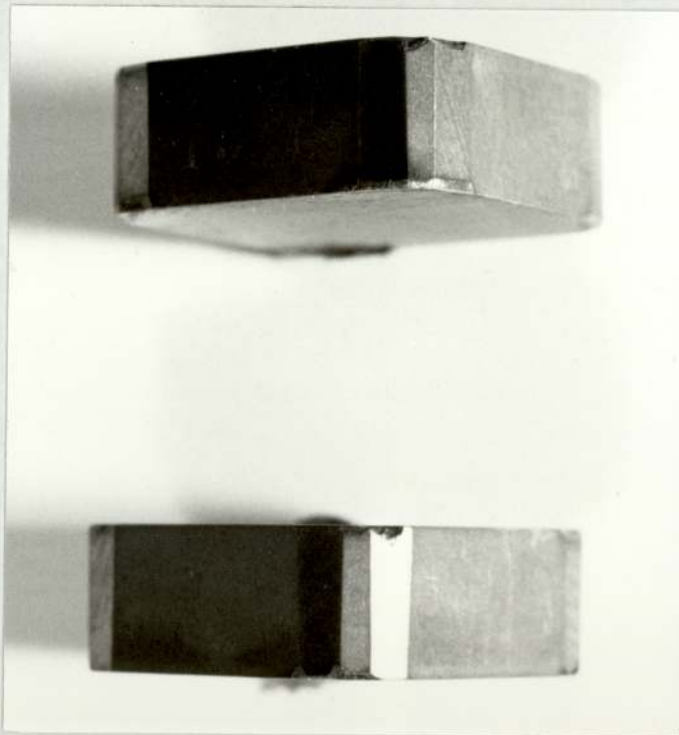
Chipping of Cutting Edges in Up-Cut Milling
